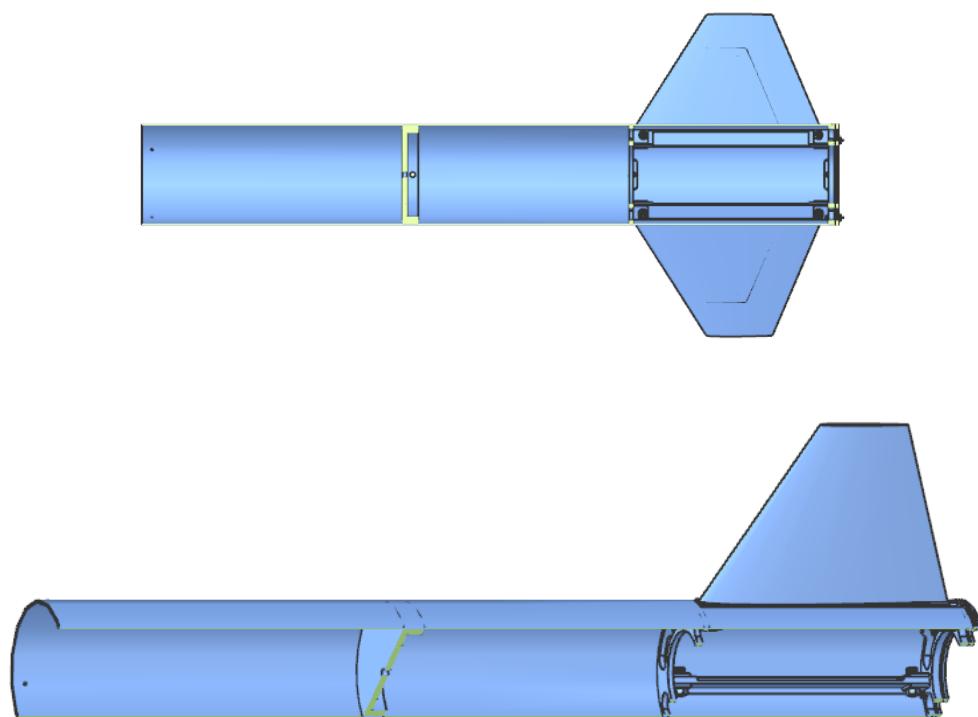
Booster Section Assembly Cross Sectional Views
